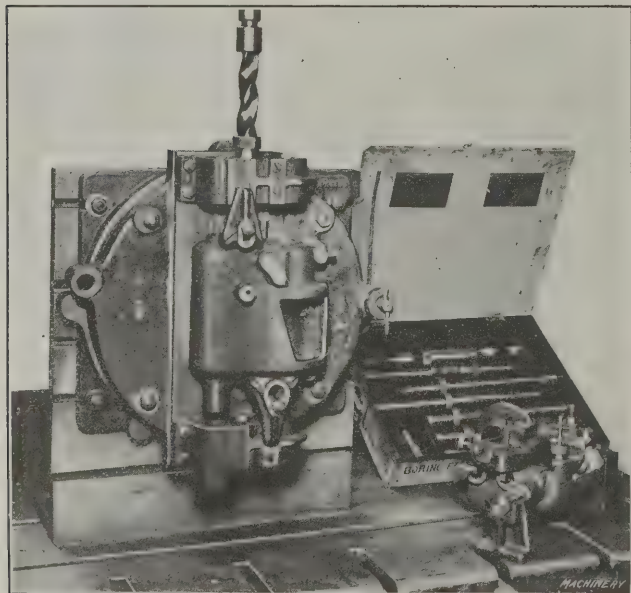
Jig and Tools for Machining Change-gear Boxes with Radial Drill
